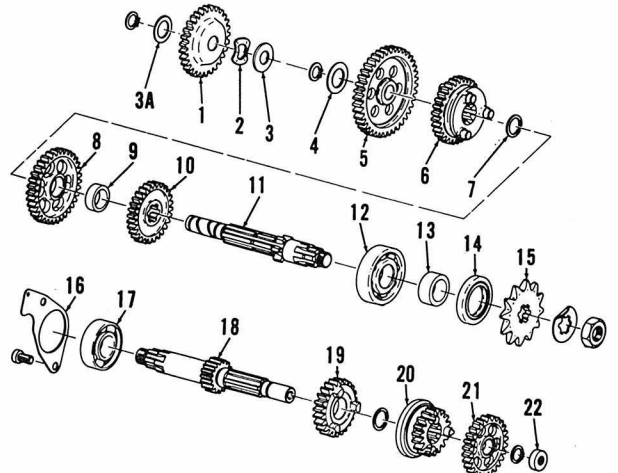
Exploded view of transmission used in JT-1 models. Thrust washer (3A) is available in three different thicknesses.
